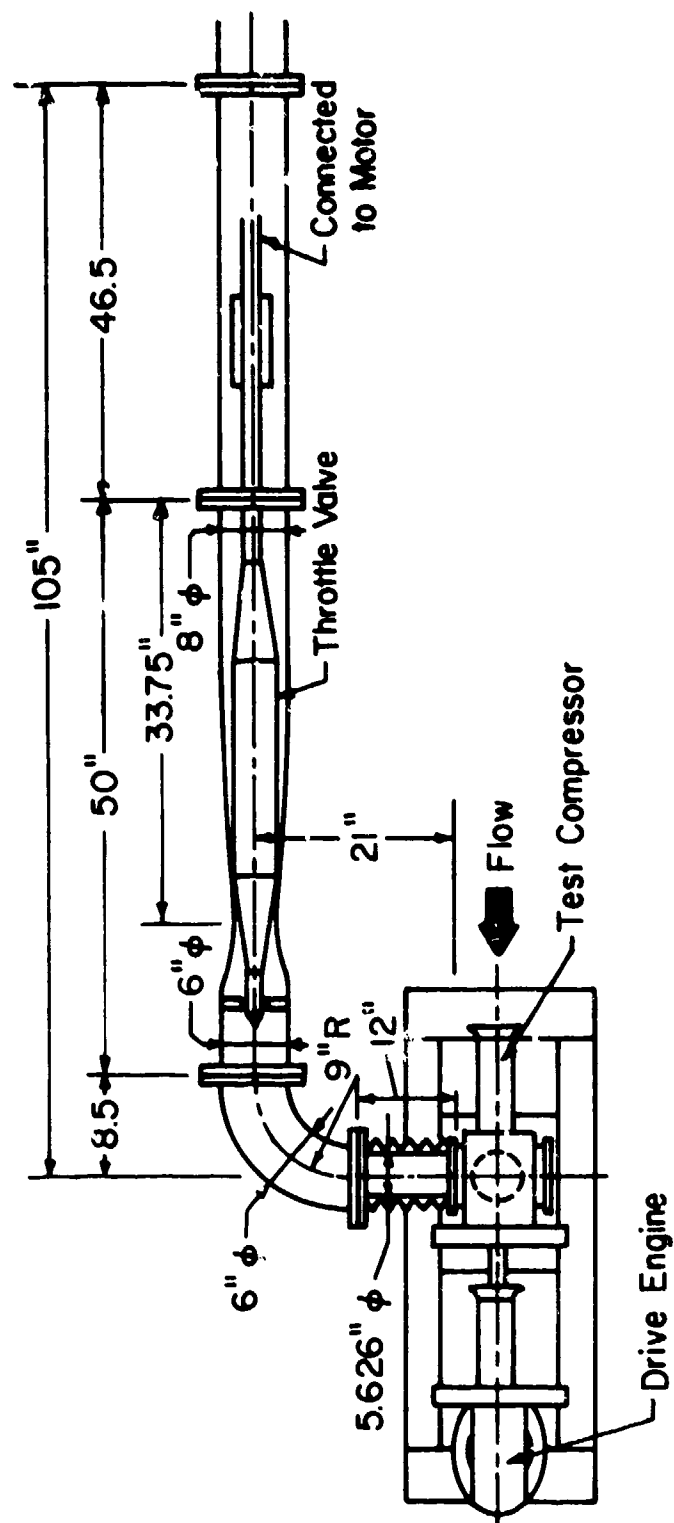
Schematic Drawing of Test Compressor Throttle Valve
